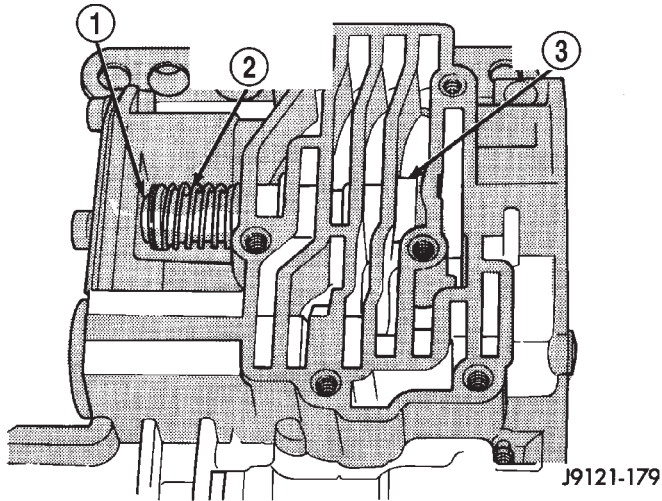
Shuttle Valve E-Clip And Secondary Spring
